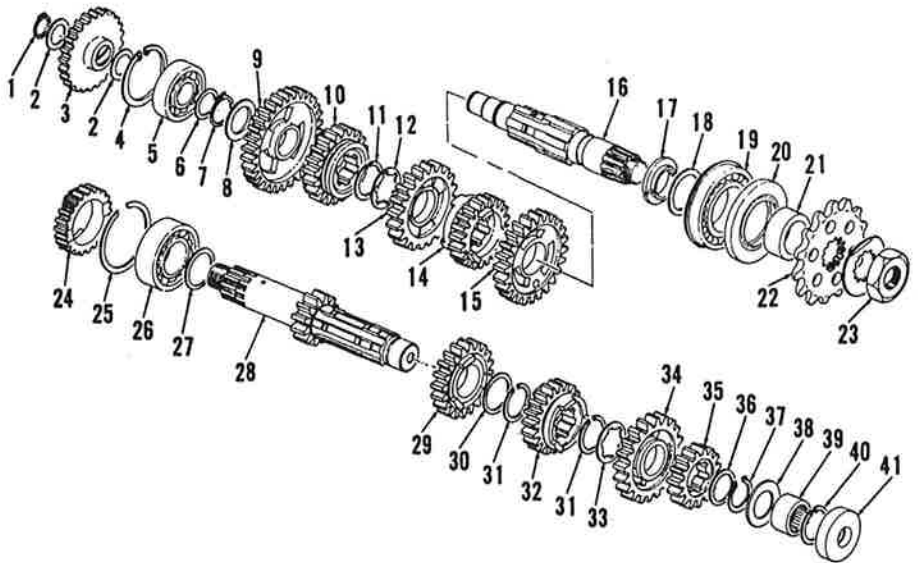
Exploded view of typical five speed transmission assembly. Four speed unit used in 500cc models is similar.
